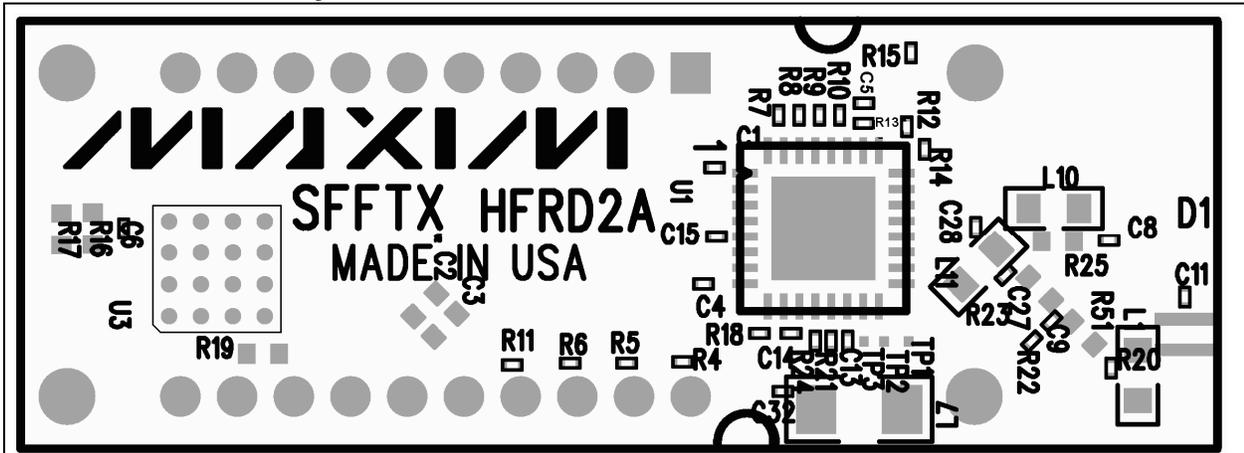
HFRD-2.0A Component Placement Guide – Component Side
